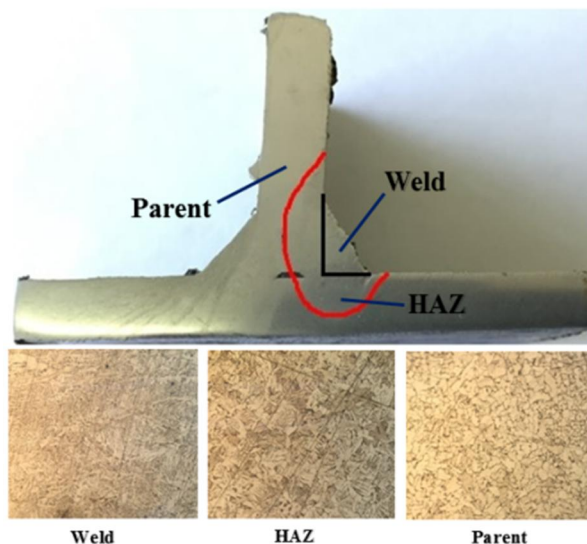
An etched section of the weldment showing the weld-penetration and micrographs of the weld-zones for AISI 1020
